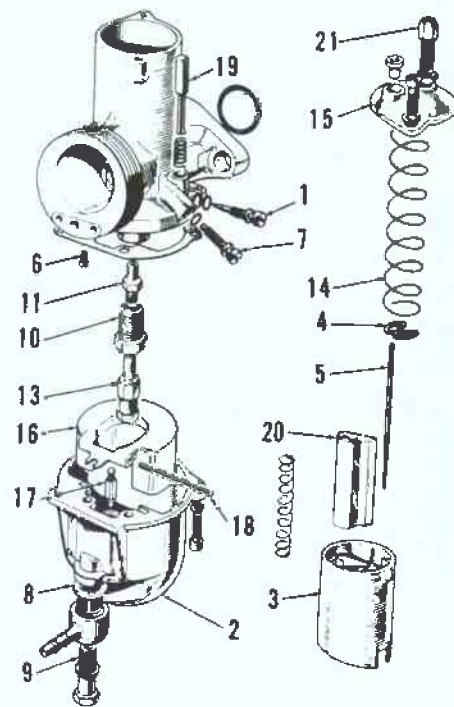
Exploded view of Amal carburetor with concentric float chamber.
